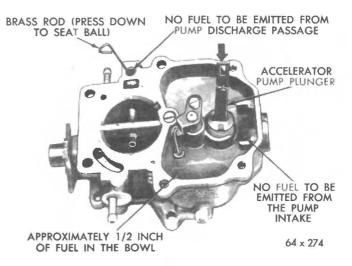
Testing Accelerator Pump Intake and Discharge Check Balls.
